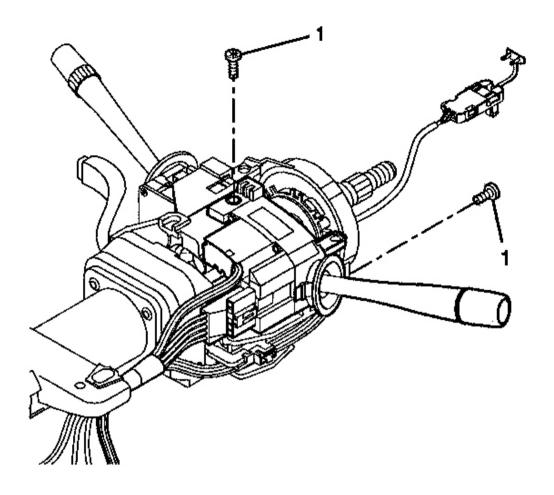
2 Pan Head Tapping Screws Courtesy of GENERAL MOTORS CORP.
